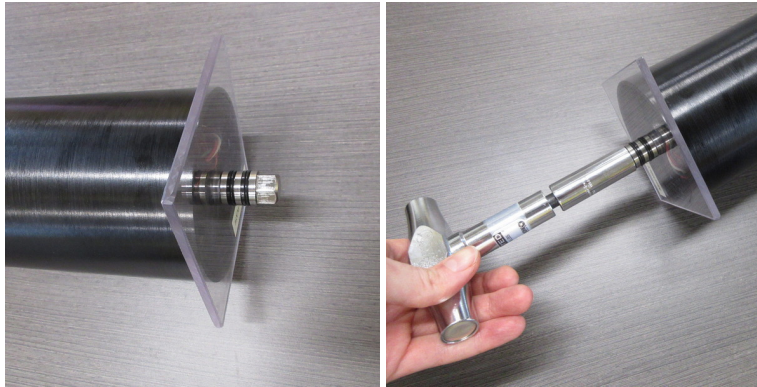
Sliding electronics into the pressure tube using the plastic plate.
